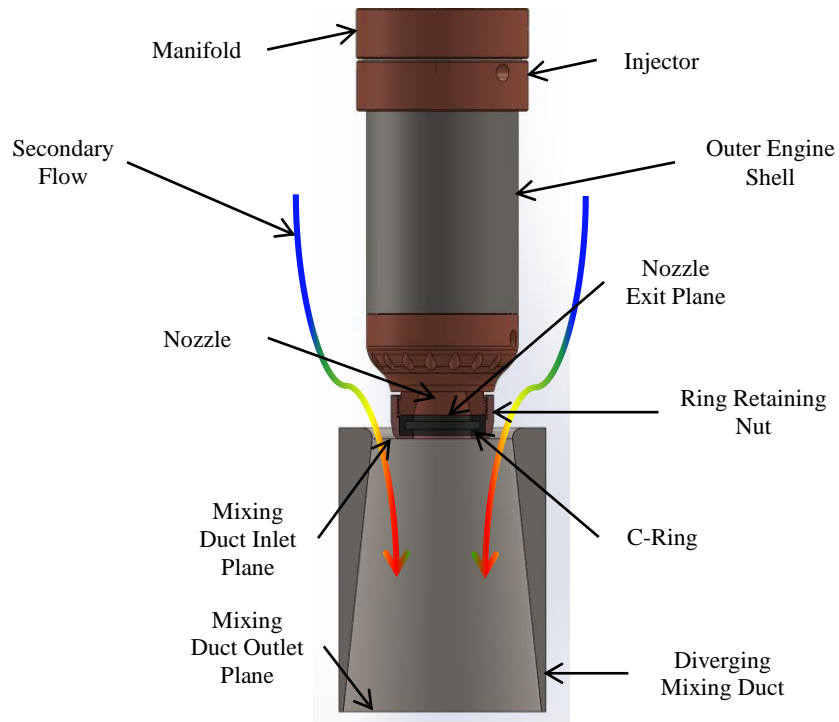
Partial section view of the engine's nozzle, C-ring, and diverging duct. Burgundy components were made of copper, the gray components were made of steel, and the black component is graphite.
